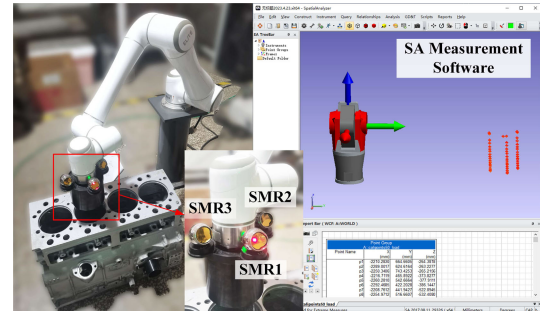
The measurement of pose by the laser tracker during the assembly process.
